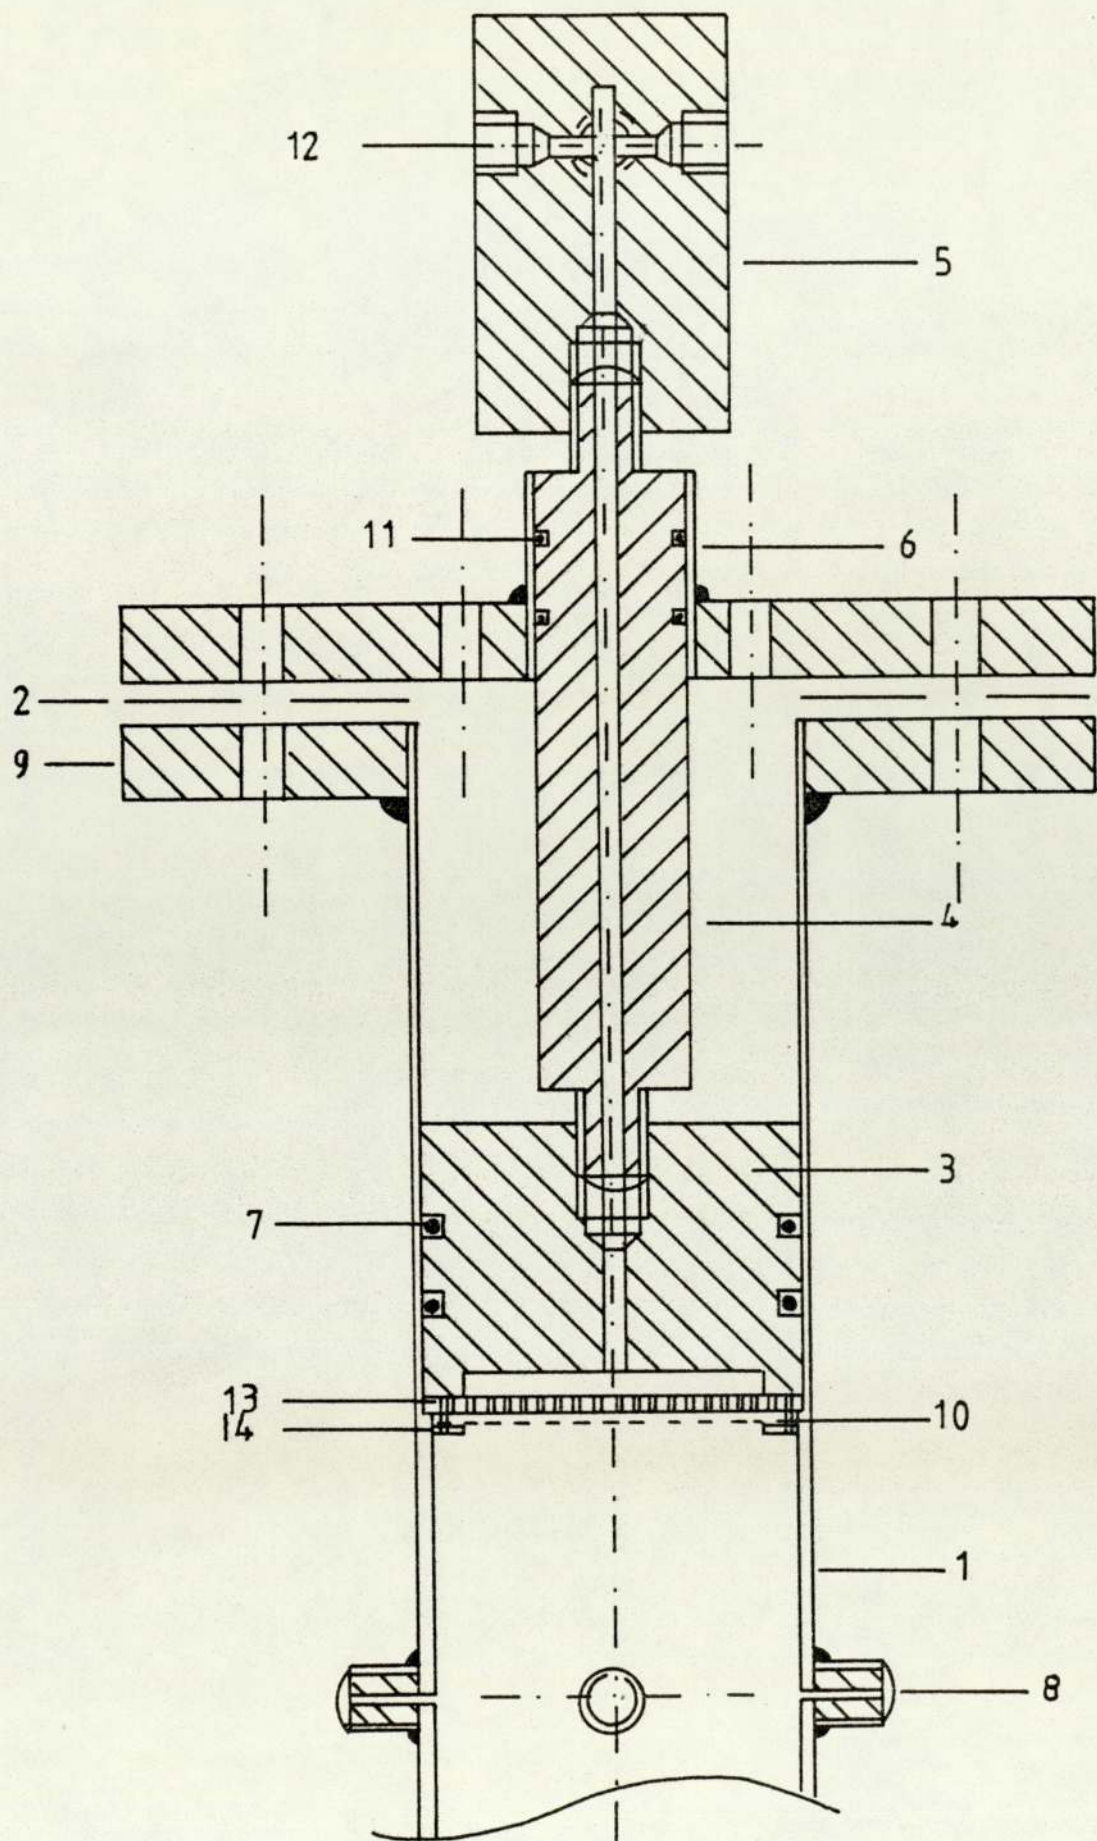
shows the top part of one of the columns with its inlet fittings. The dimensions and material of construction of various parts are listed with the figure. The inlet assembly consisted of an inlet head with four ports and a compression plunger. The ports were tapped to accommodate 6.4 mm Festo fittings to which the feed, eluent, purge and transfer lines were connected. Liquid channels of 3.0 mm diameter were drilled through the head, the plunger and the piston. To ensure an even velocity profile of the liquid entering the column a perforated polypropylene distributor was placed beneath the piston. A fine polypropylene mesh was used to prevent the packing resin from blocking the liquid ducts.
